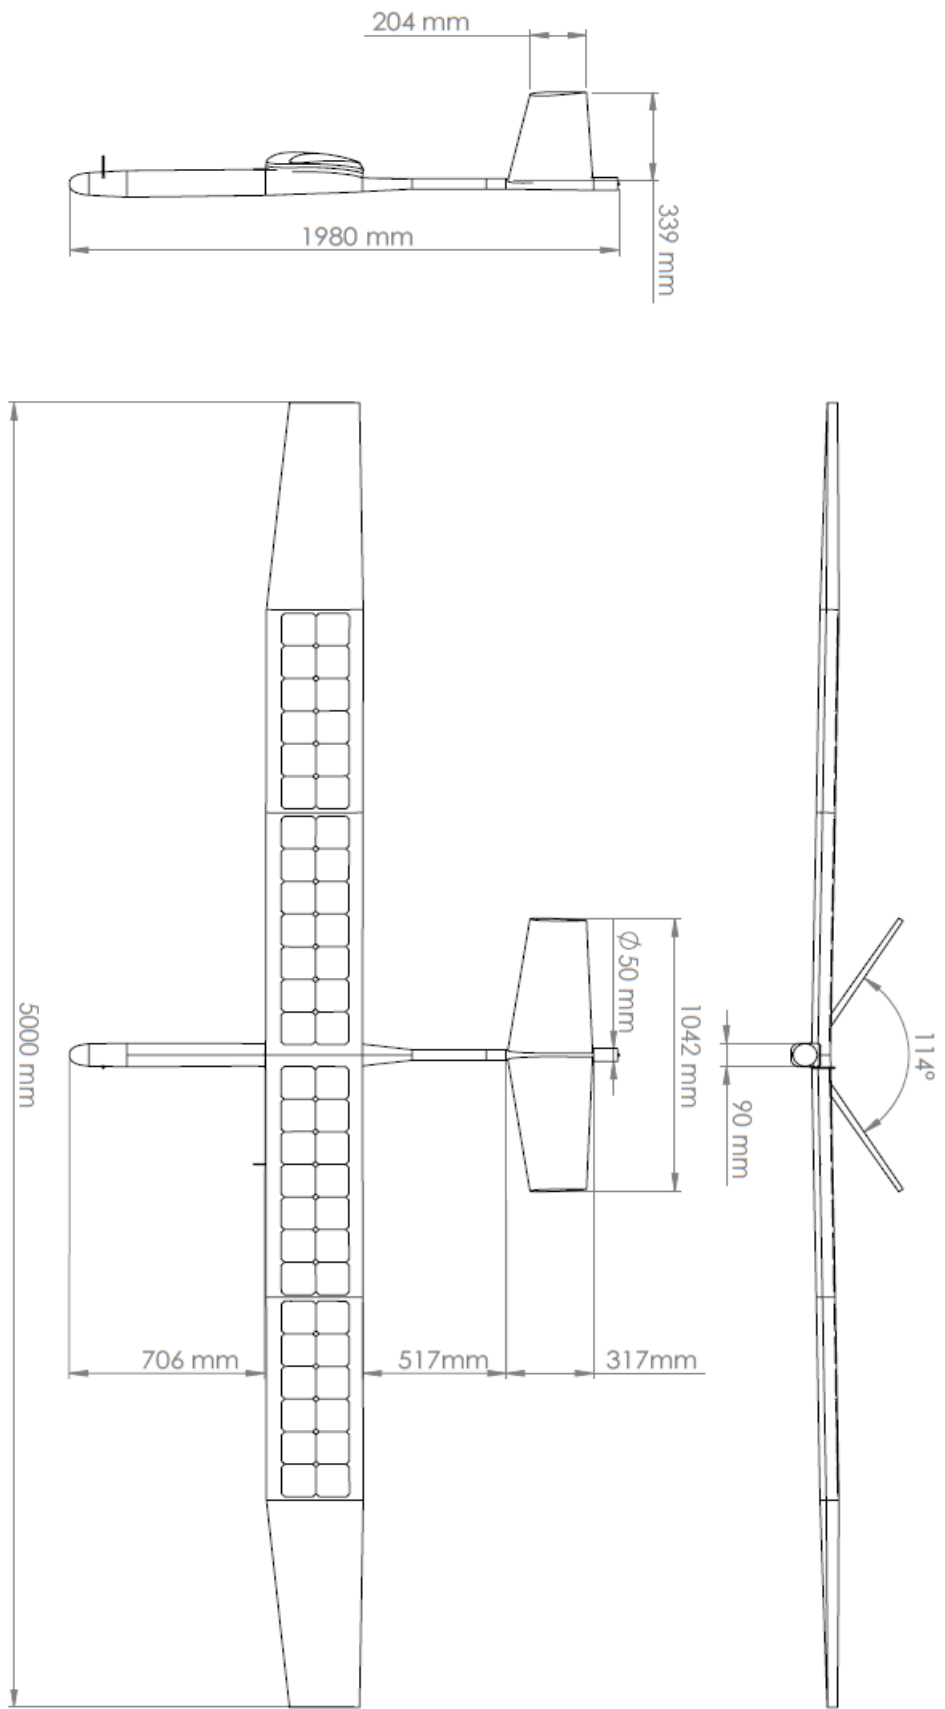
Three view drawing of the LEEUAV (dimensions in mm).
